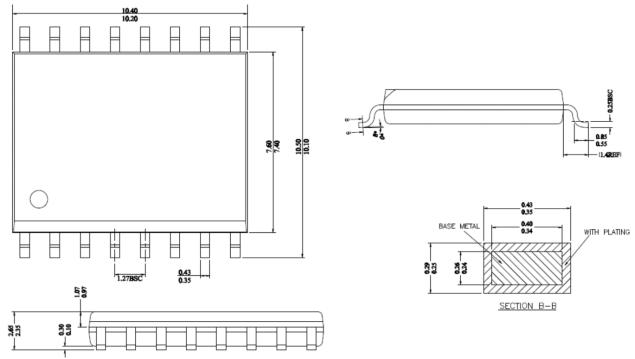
Lead Wide Body SOIC [WB SOIC-16] Outline Package-dimension unit(mm)
